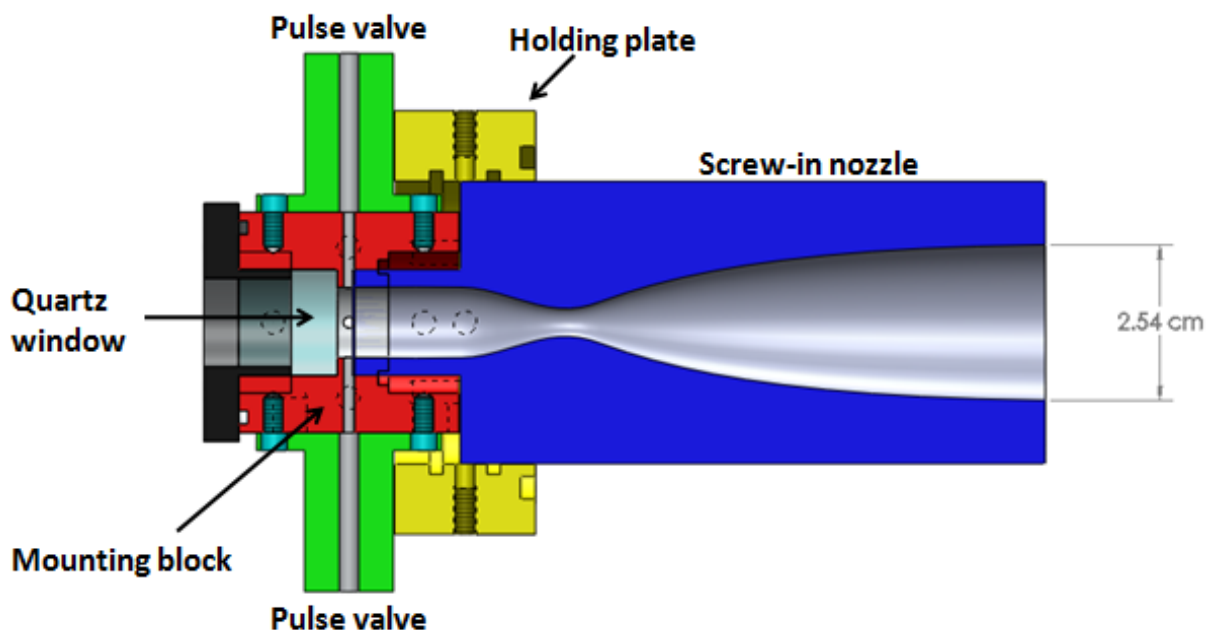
Nozzle assembly fitted with the Mach 4.6 axisymmetric nozzle.
